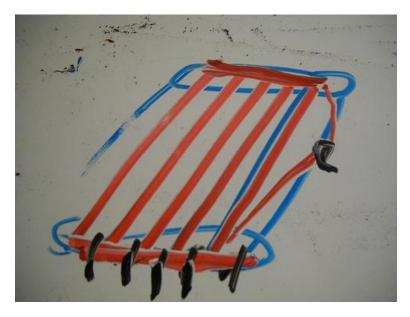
Conveyor Belt New Concept (White Board Drawing)
